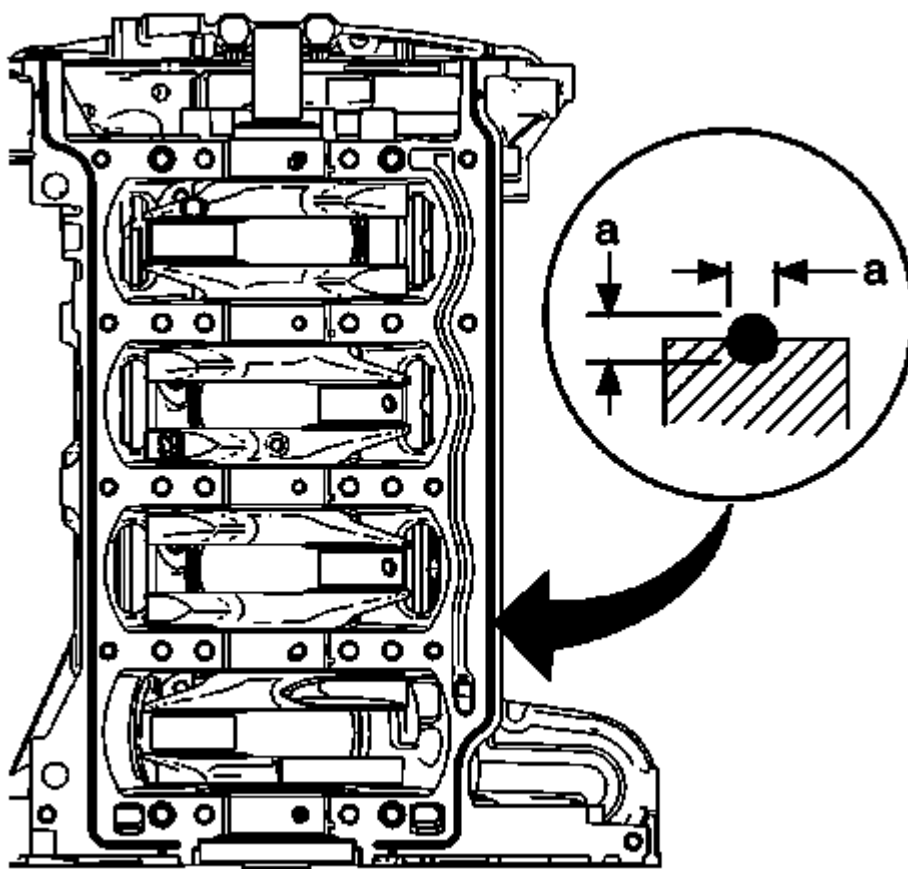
View of Bead of Sealer on Bedplate Mating Surface
